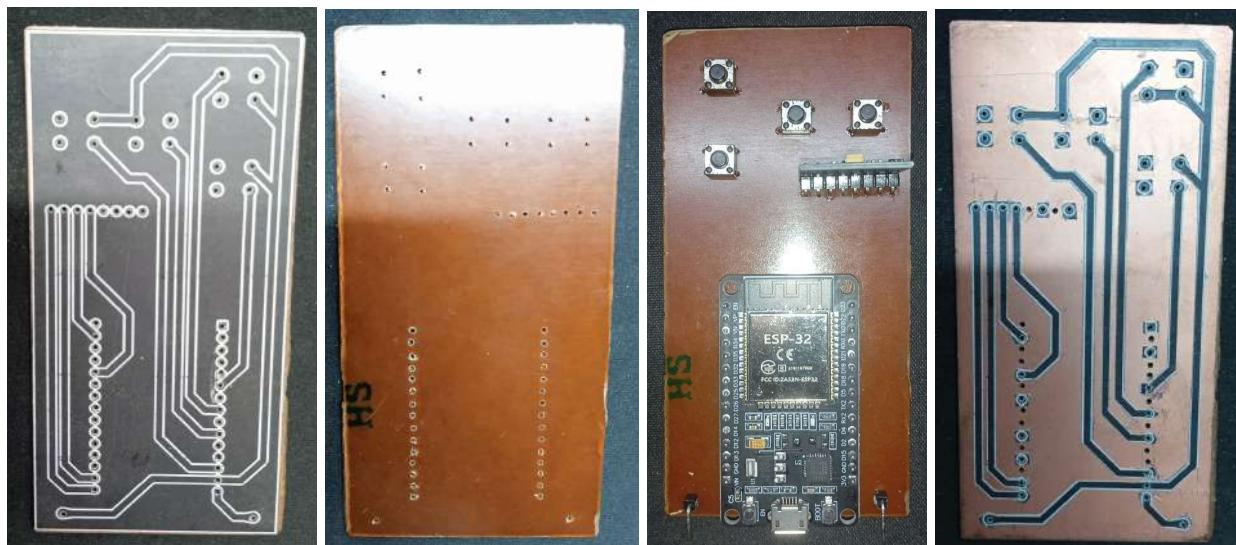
Drilled Copper Clad, Component Fit Test, and Cut-out Circuit.
